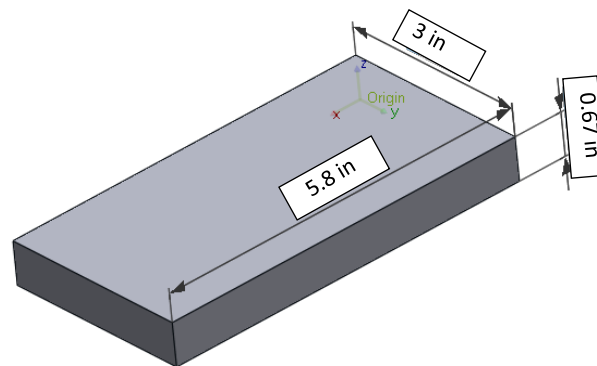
CAD Generated Perfect Shape for Face Milling Rough Pass
